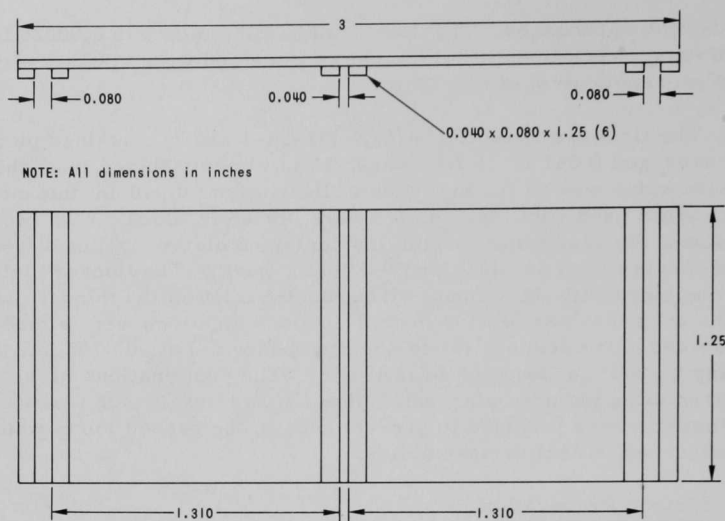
Fixture Used for Spot Welding Spacer Wires to Plates with Tweezer Electrodes
